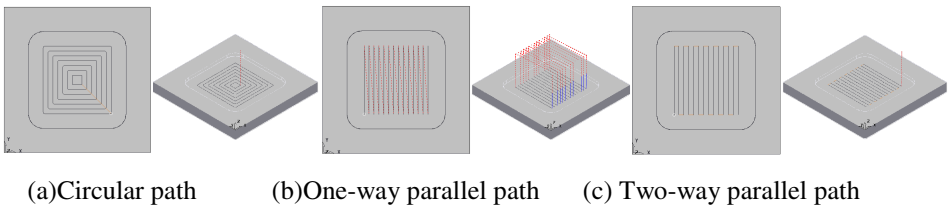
Cutting path designs for the pocketing of the rectangular through holes
